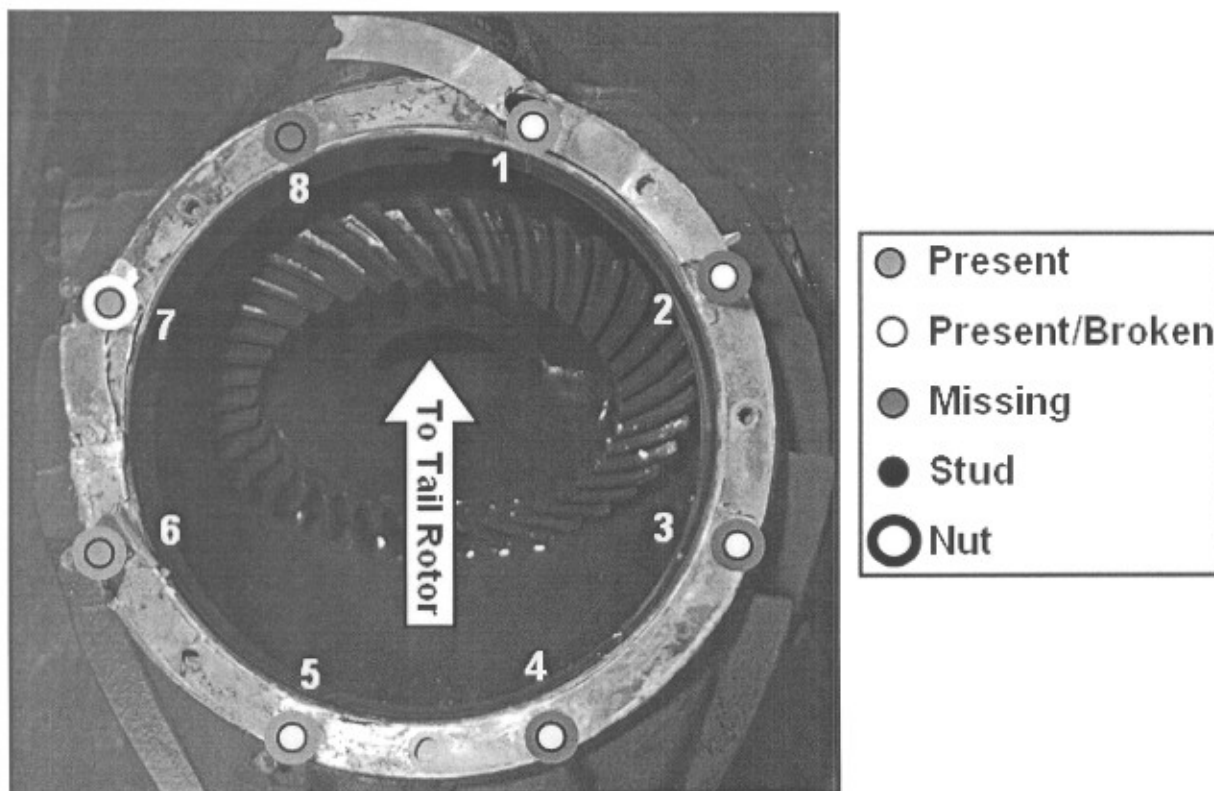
IGB Center Housing as viewed from front to back of aircraft
